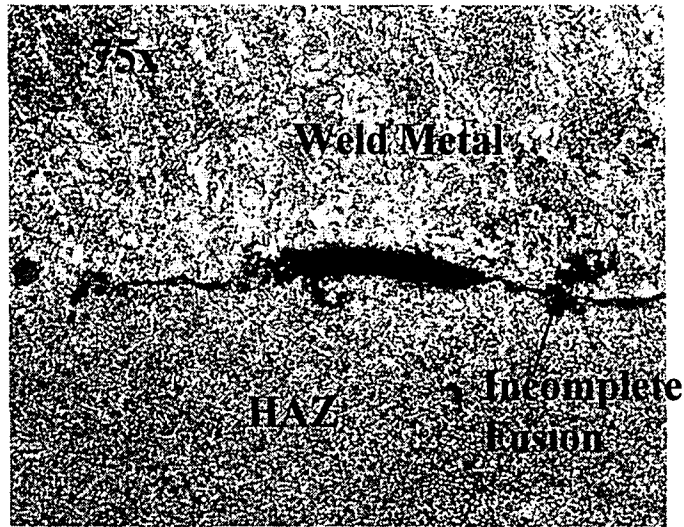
Incomplete Fusion-Specimen 36-6, Top-right Section
